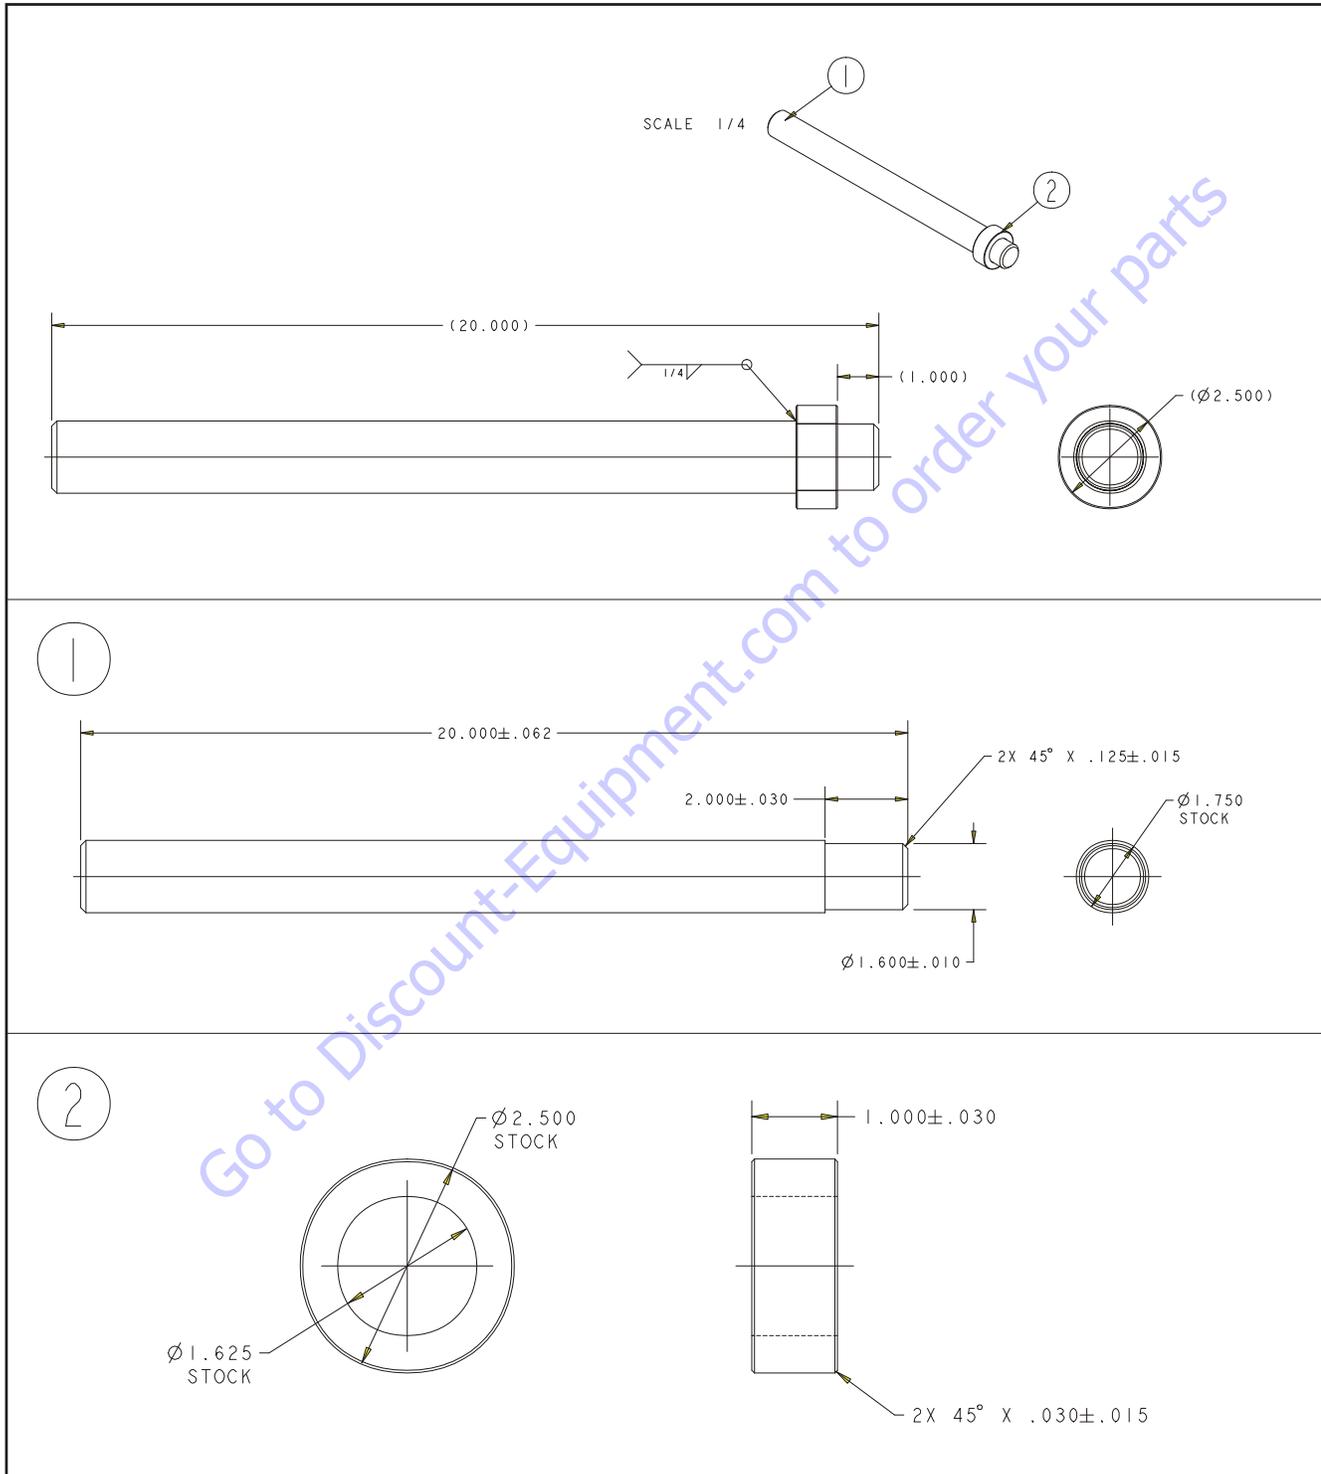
Load Pin Removal Tool, JLG PN 4846765
